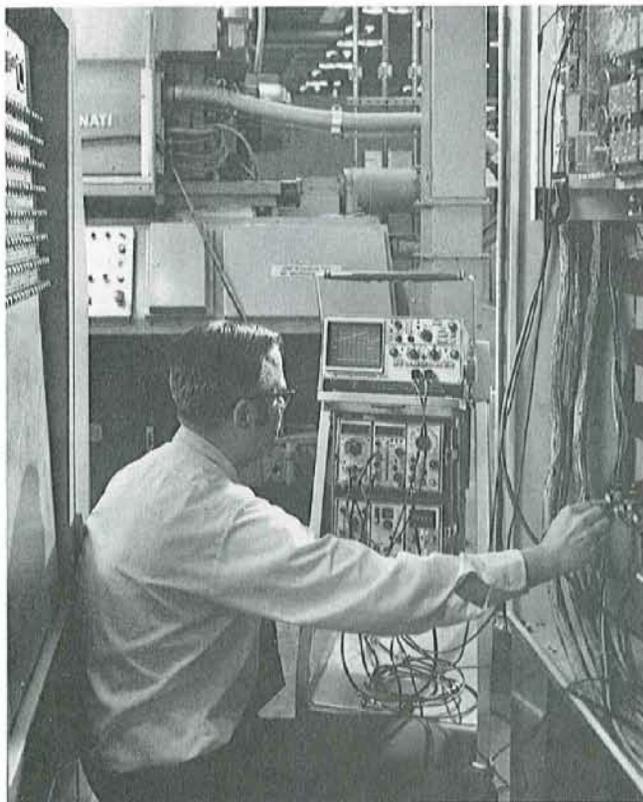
Checking out a sophisticated machine control unit, using a TM 500 Mobile Test Lab.
